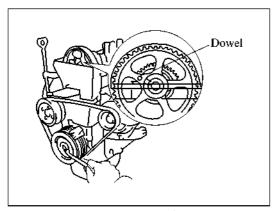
2 - 11 Align the Assembling Symbols on Gear
